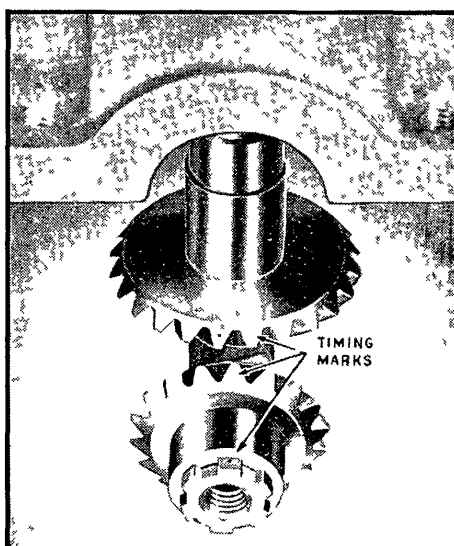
Lower tower shaft timing gear marks. 1946-52
